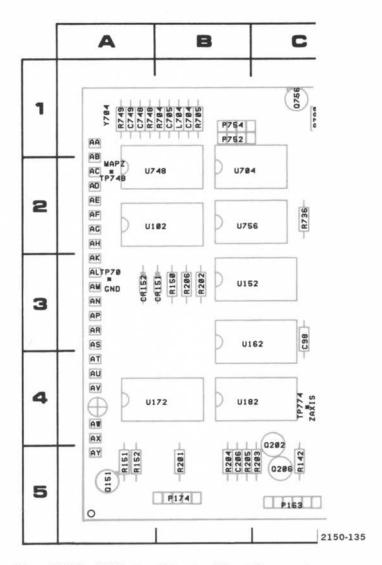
Partial A4—Acquisition circuit board. Component locations as viewed from component side of the board.
